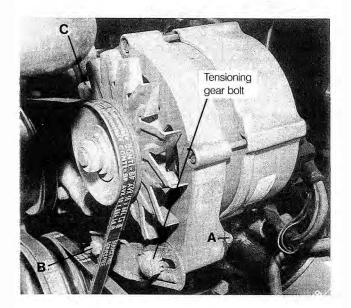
Alternator mounting bolts (A and B), and pivot bolt
